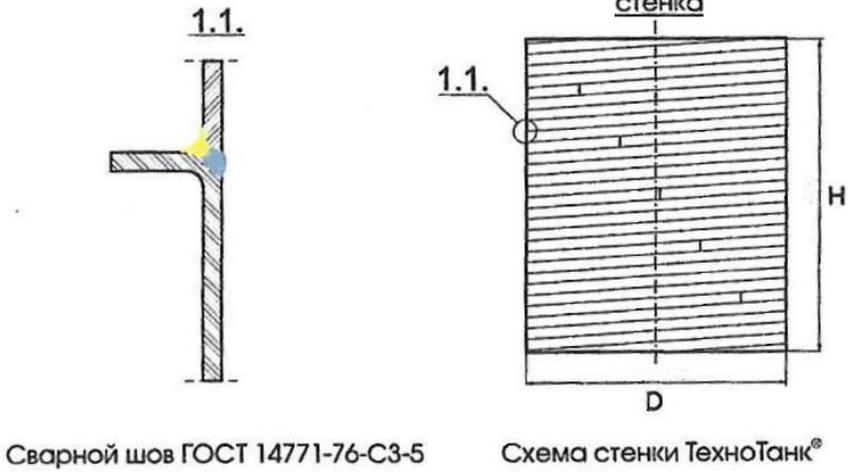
Spiral-wound welded method of joining VST sheets
